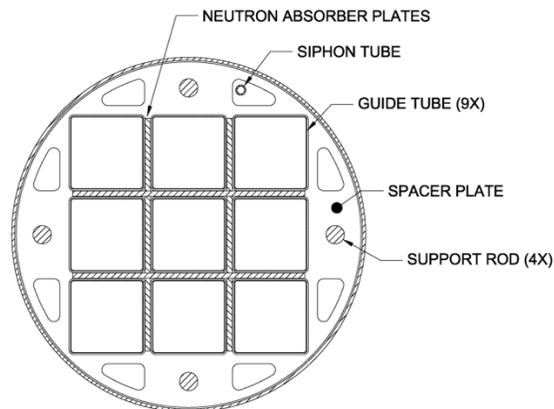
Cross-Section Showing Basket Arrangement for the 9-BWR STAD Canister
